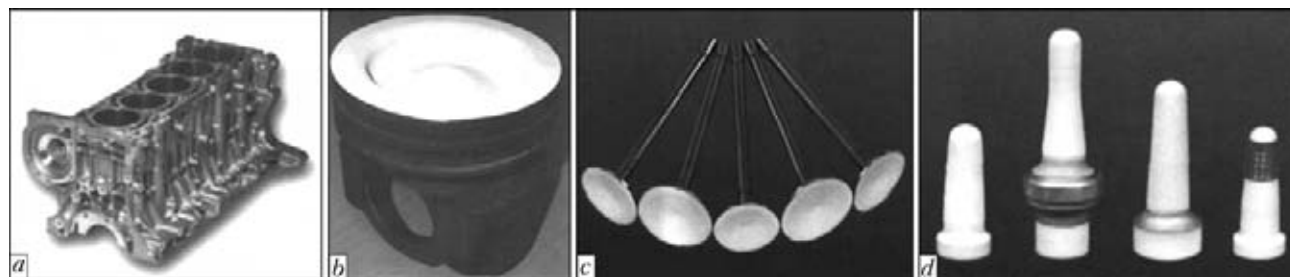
ICE parts with TBC: a – engine cylinders; b – piston; c – exhaust valves; d – exhaust sensor, oxygen sensor
